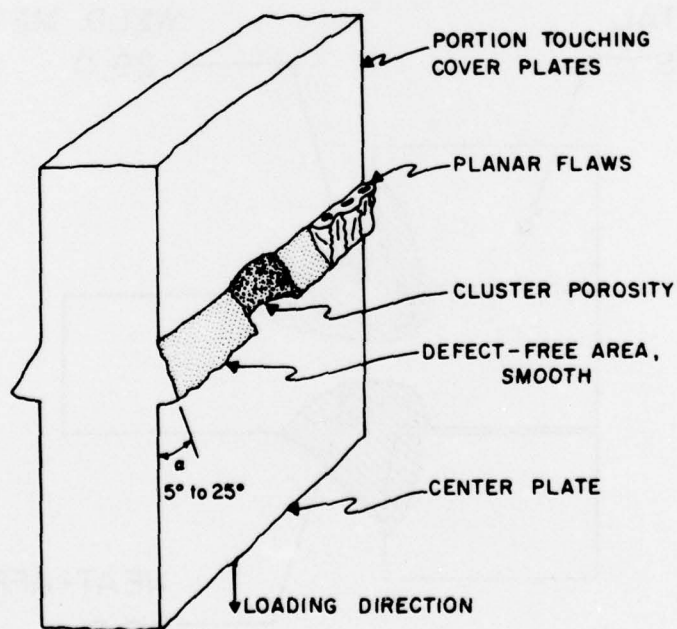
Composite fracture surface of fillet weld specimen showing the types and locations of the defects encountered and the fracture surface of unflawed regions (smooth).
